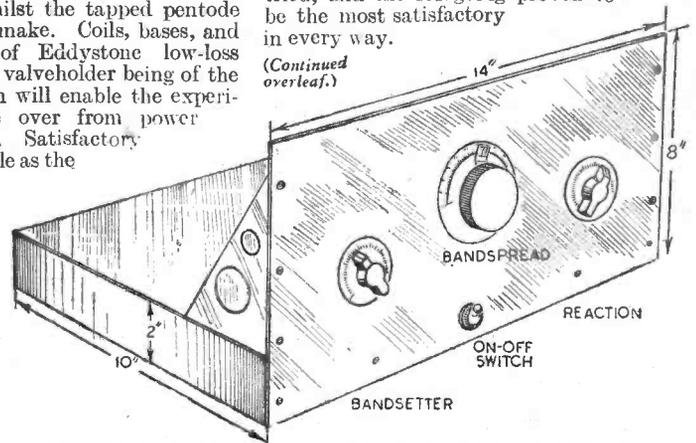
Chassis and panel assembly, showing the layout of panel components.
